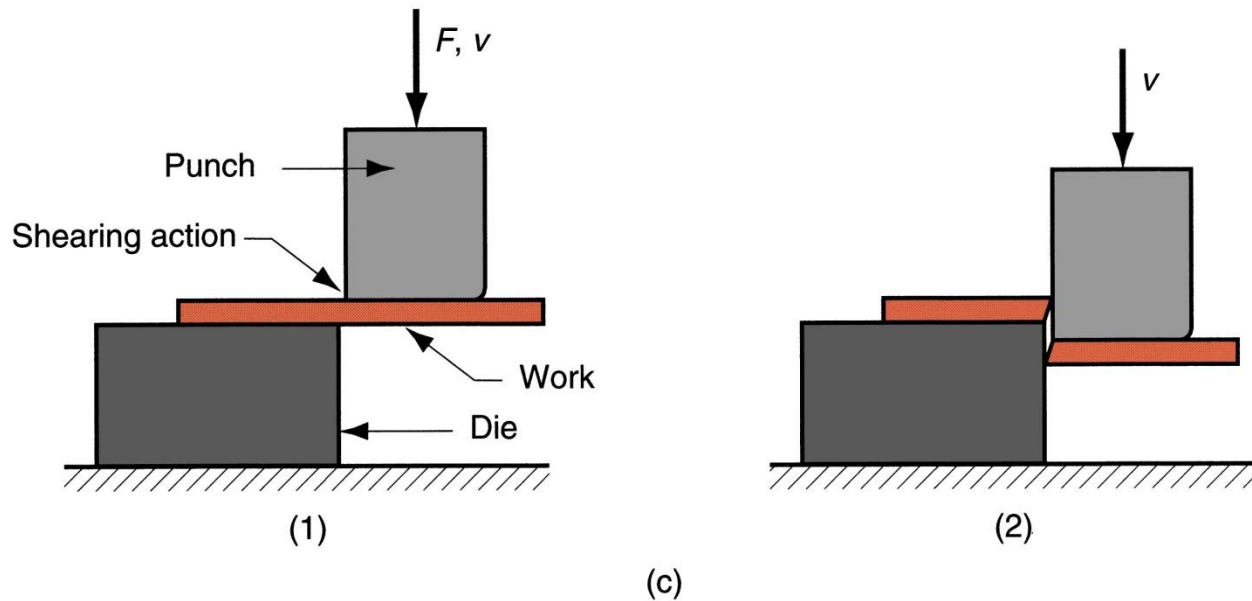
Basic sheet metalworking operations: (c) shearing
